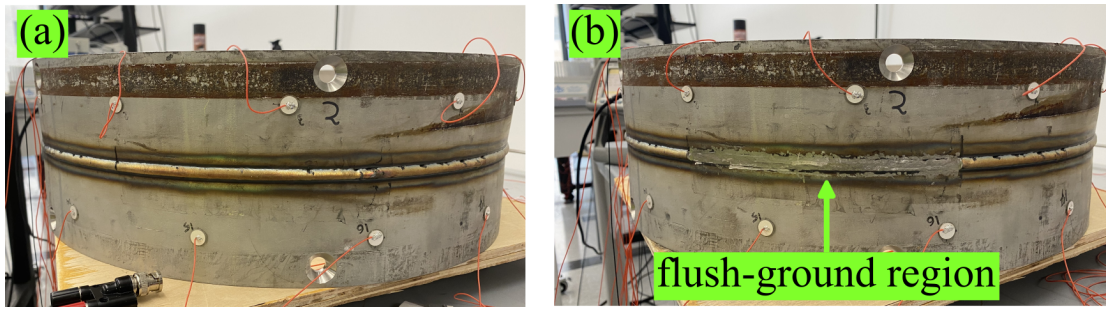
The specimen with (a) pristine and (b) damaged circumferential weld.
